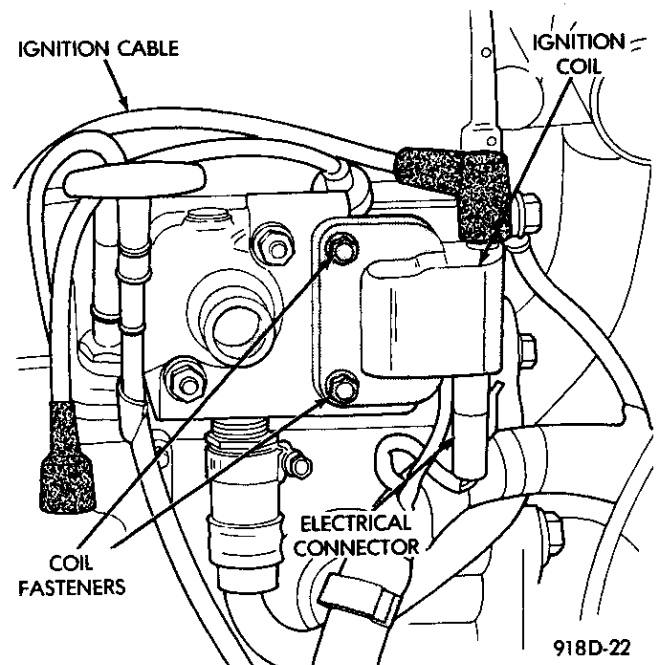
Coil Harness Connector—2.5L Engine—Typical
